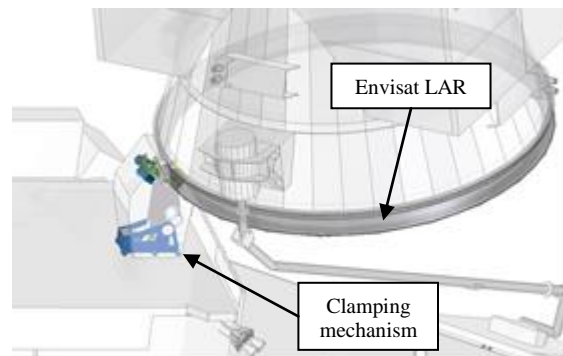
Location of the clamping mechanism on the Space Tug's top panel.
